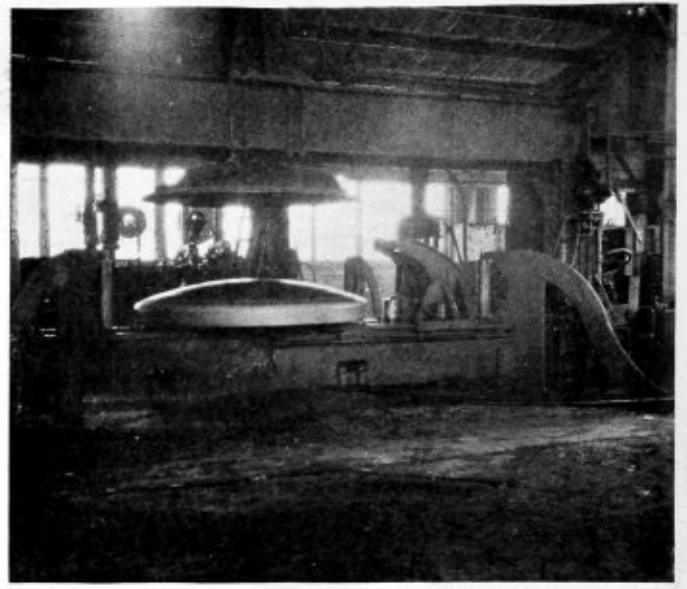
Finished Head After the Second or Flanging and Dishing Operation on the Spinning Flanging Machine
